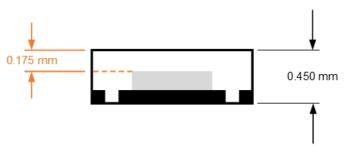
XtremeSense TMR Sensor Location in z Dimension for CT100 in DFN-6 Package
